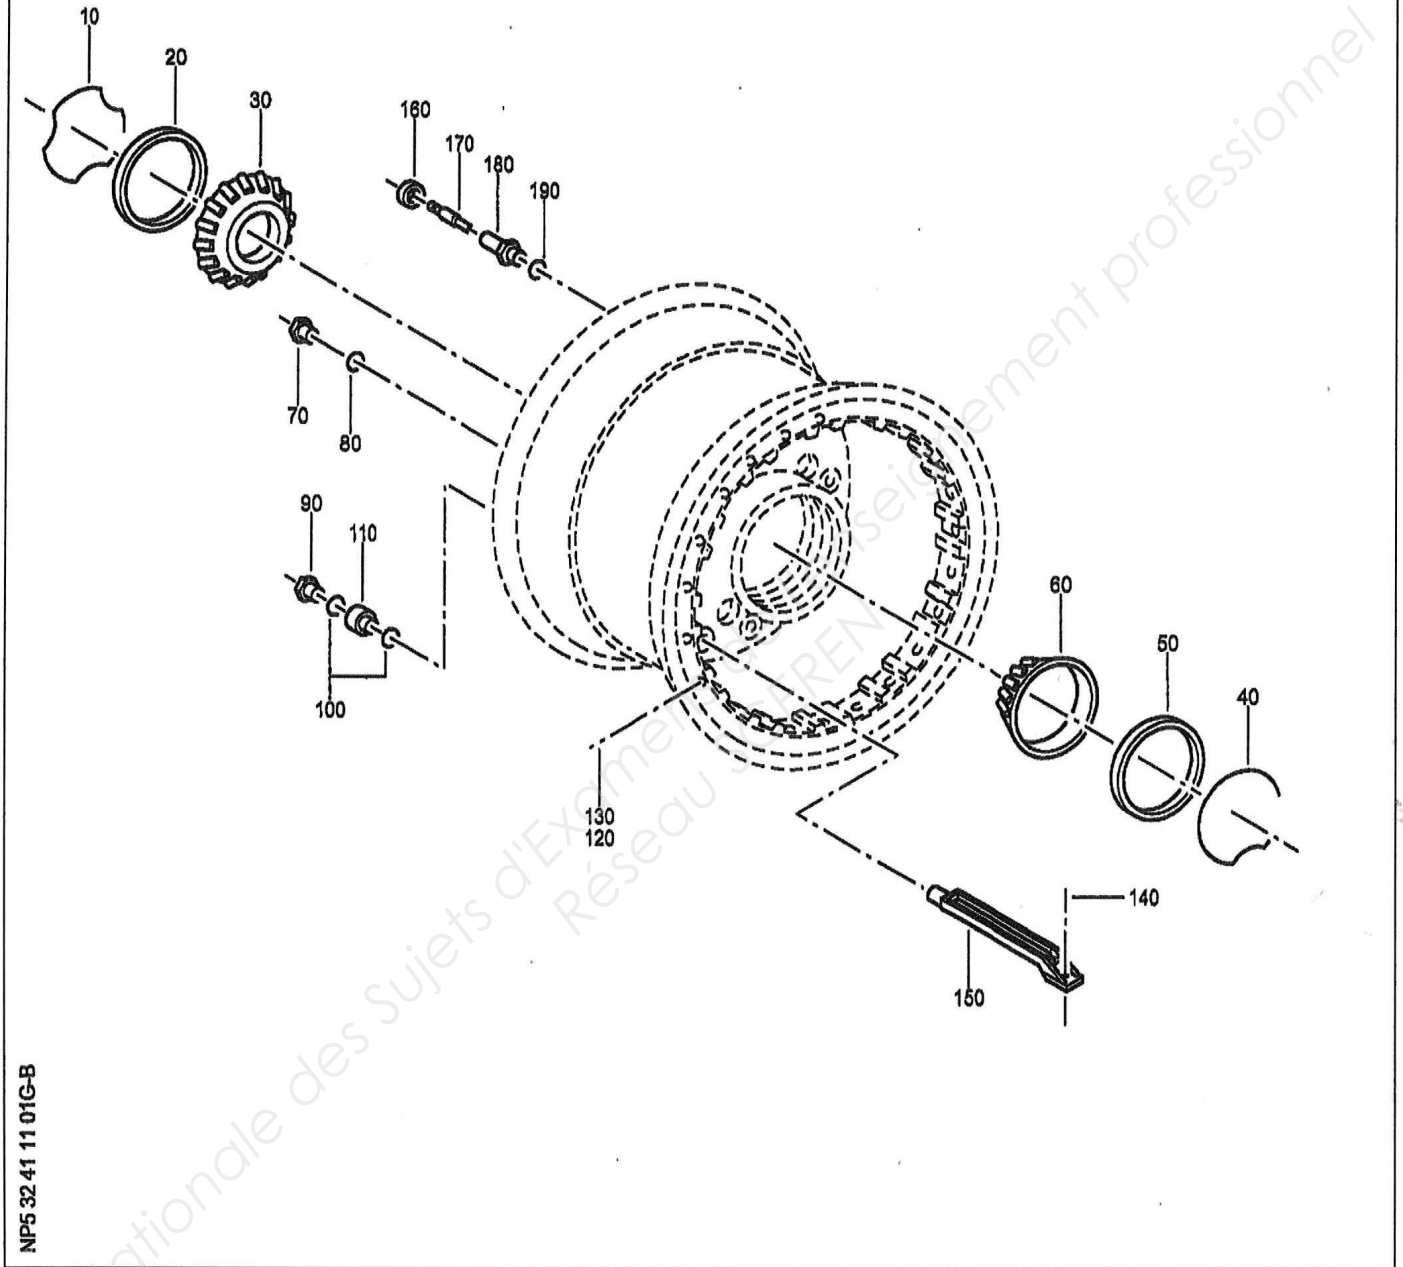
/ SHEET 401A.1/1 - Main Gear Wheel
